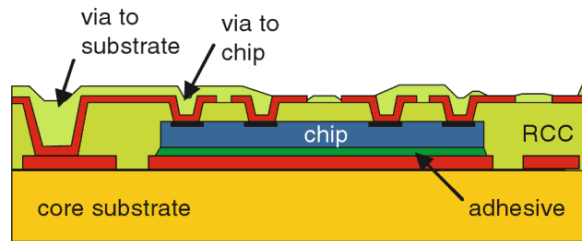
Schematic view of an embedded die in a PCB build up layer [12]
